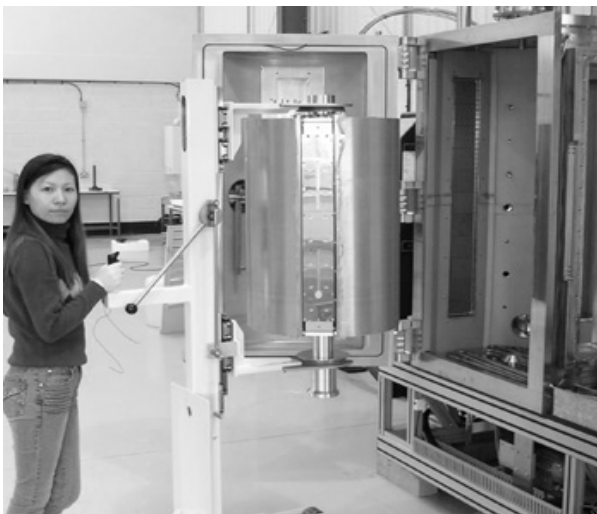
Demountable drum with drum handling tool. A separate tool is used to apply sheet under tension to the drum.
